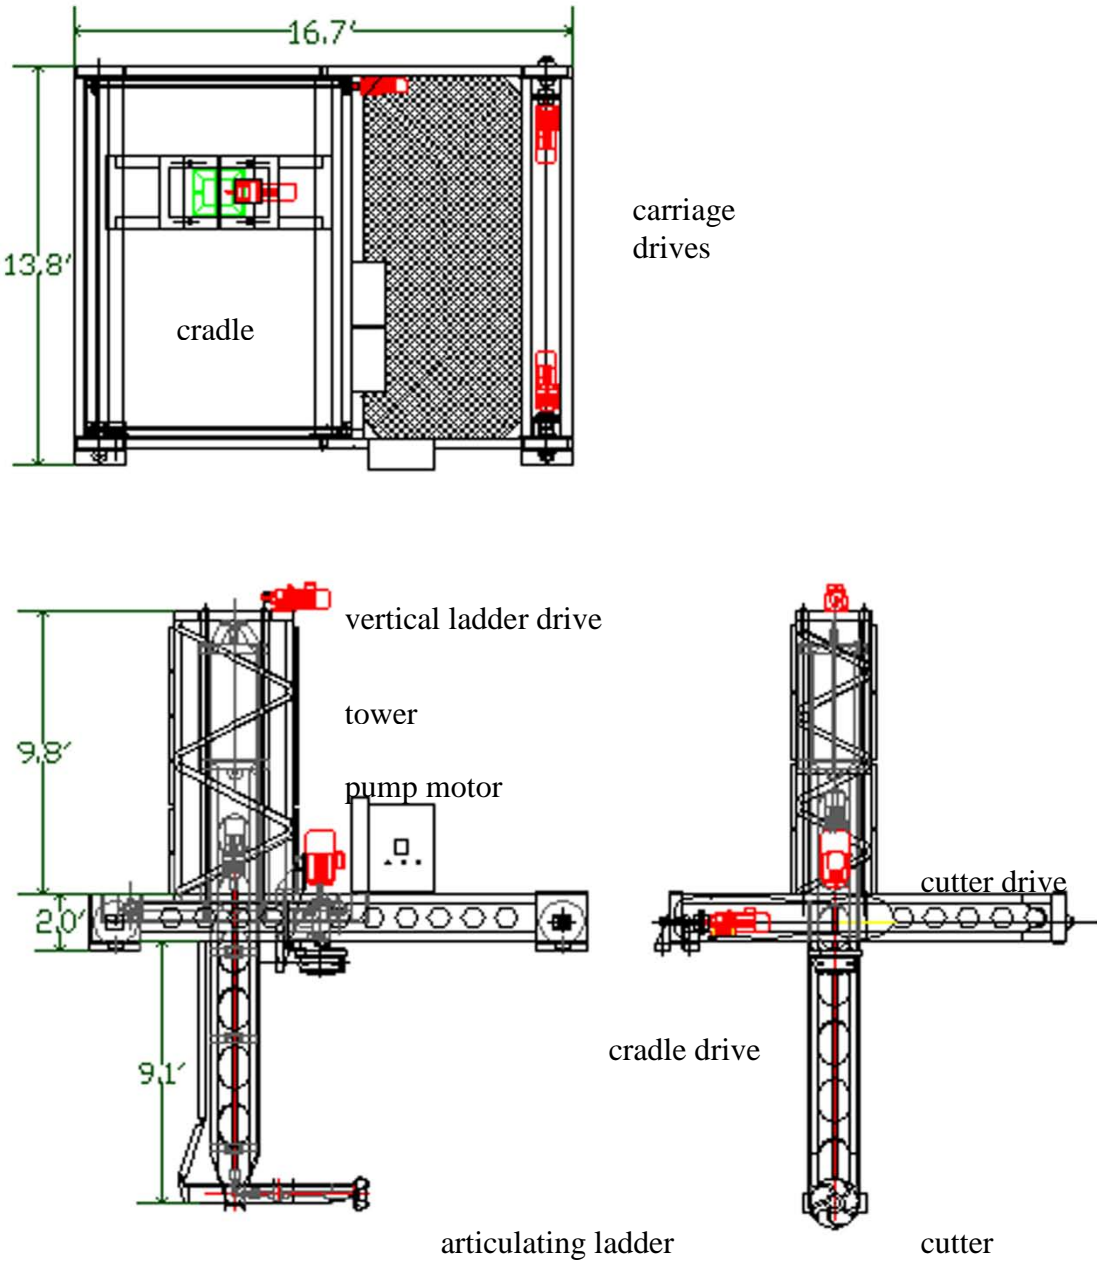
Dredge/Tow Carriage Assembly Drawing (dims in ft, divide by 3.28 for m)
